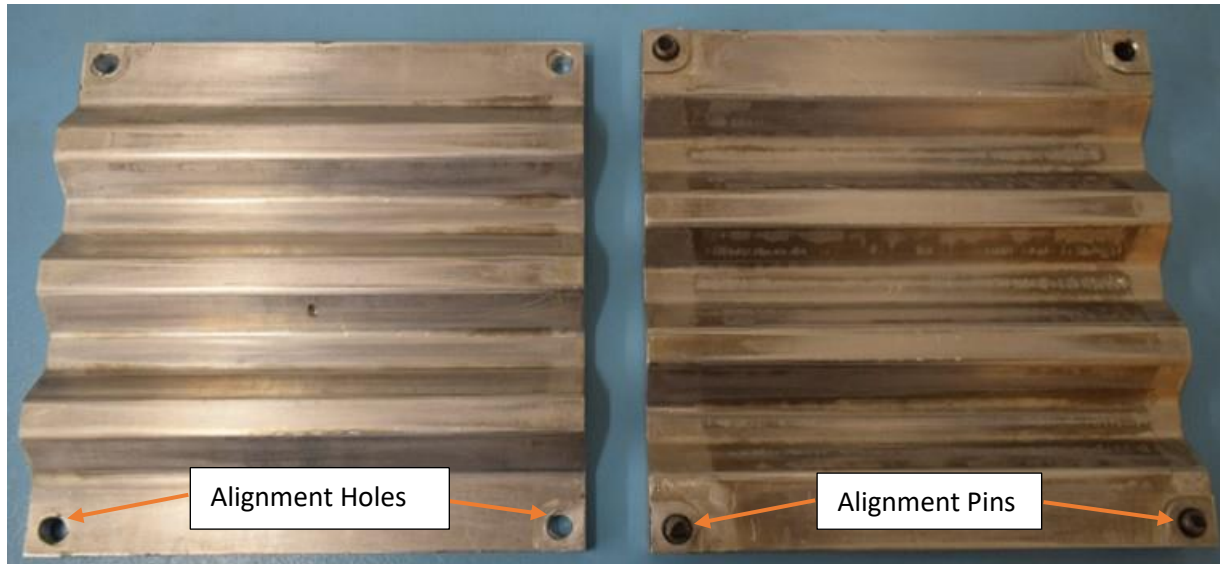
Left: Top Half of Compression Mold, Right: Bottom Half of Compression Mold
